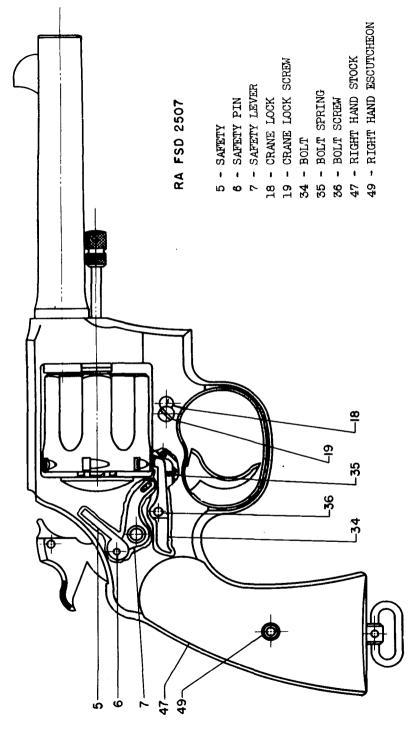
COLT, REVOLVER, CAL. 45, M1917 - RIGHT SIDE VIEW
